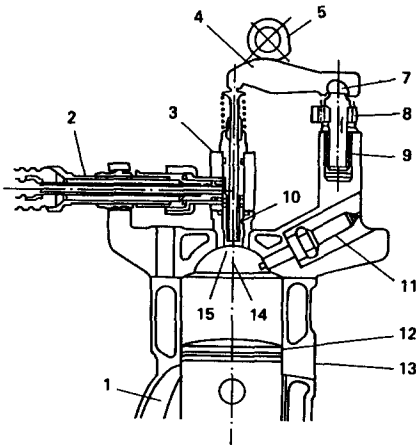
Diagram of a device for hydrogen injection into the cylinder of a two-stroke engine: 1 = scavenging port; 2 = hydrogen pipeline insulation; 3 = sprayer; 4 = rocker; 5 = camshaft; 6 = toothed rack; 7 = heel; 8 = gear wheel; 9 = screw; 10 = valve; 11 = spark plug; 12 = piston upper part; 13 = outlet; 14 = combustion chamber; 15 = injector.
